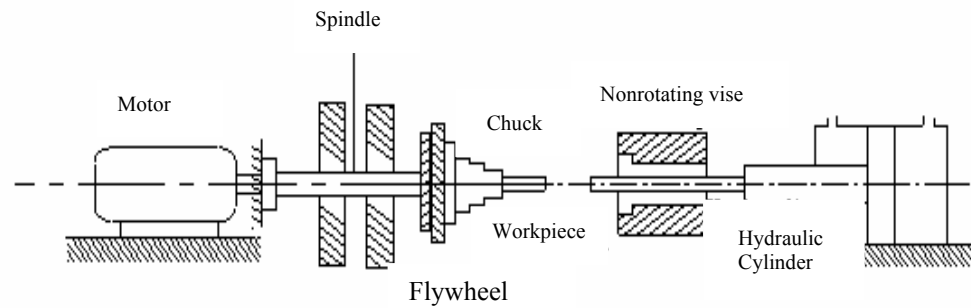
Schematic diagram of inertia friction welding [12]
